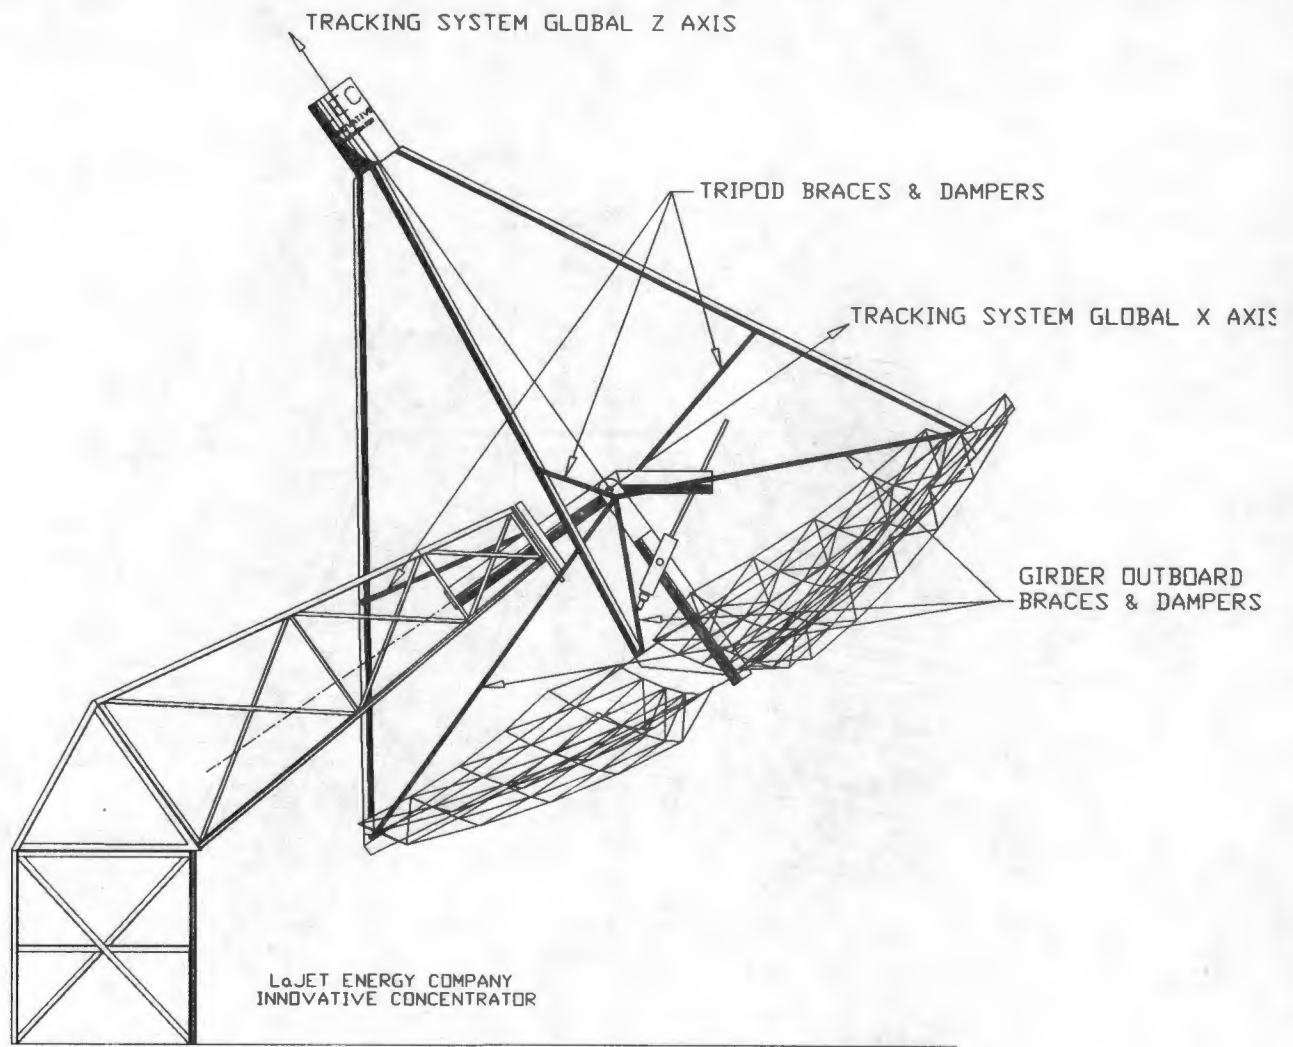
Tripod In-Plane & Girder Vertical Stiffeners & Dampers
